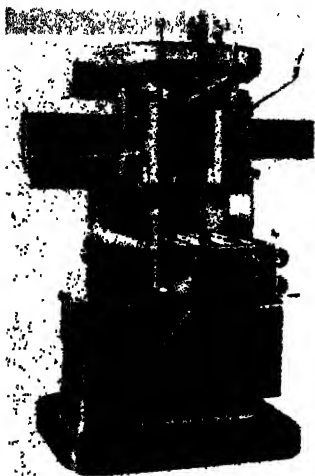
Profiling machine. (Pratt & Whitney)
